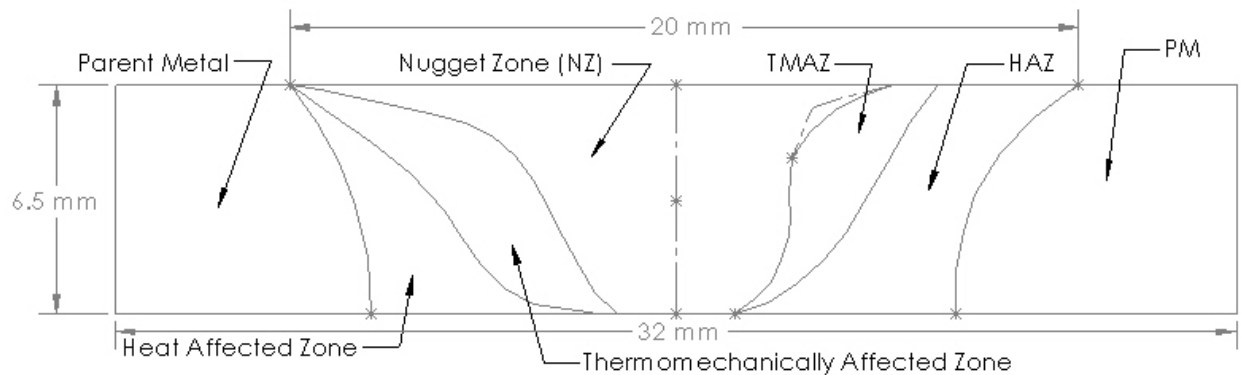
Different weld zones in friction stir welded sample (with approximate dimensions).
